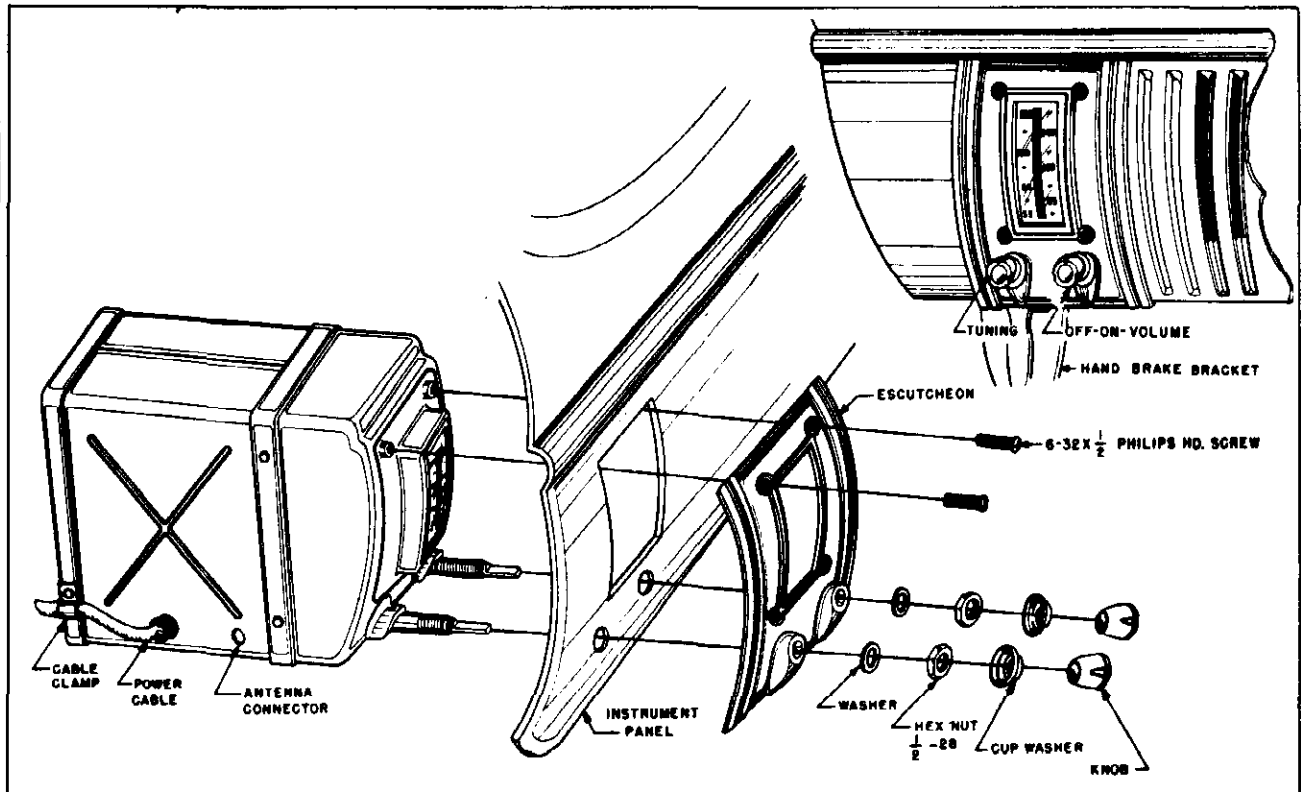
R.F. TUNING UNIT DETAIL MOUNTING ASSEMBLY
